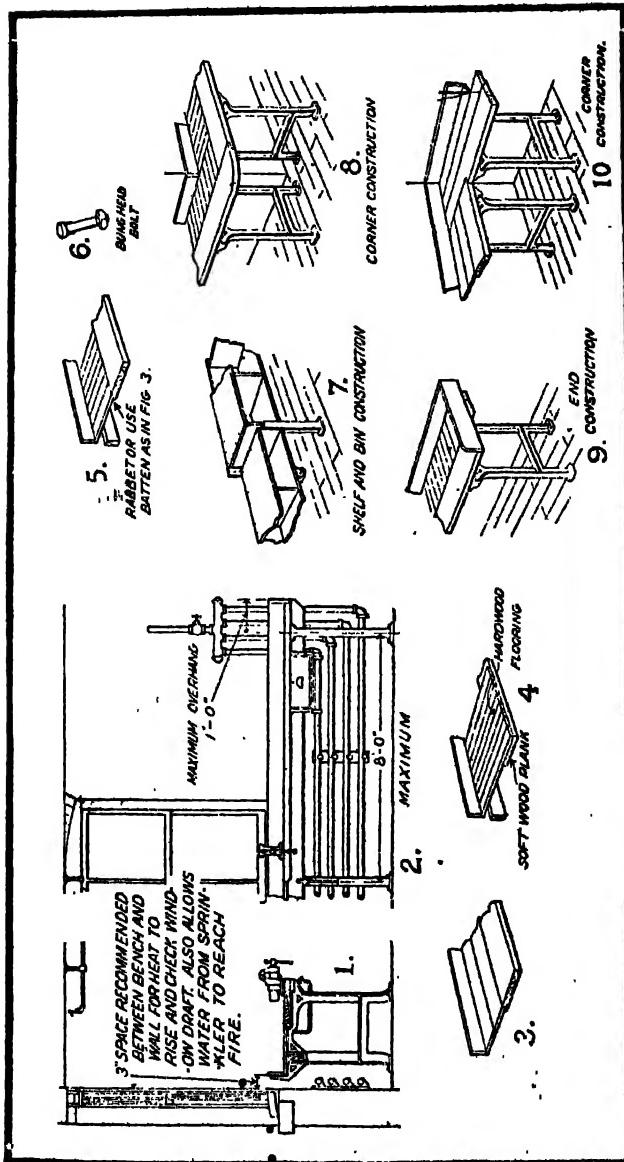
Methods of Constructing Shop Benches, Using Standard Cast Iron Bench Legs.
